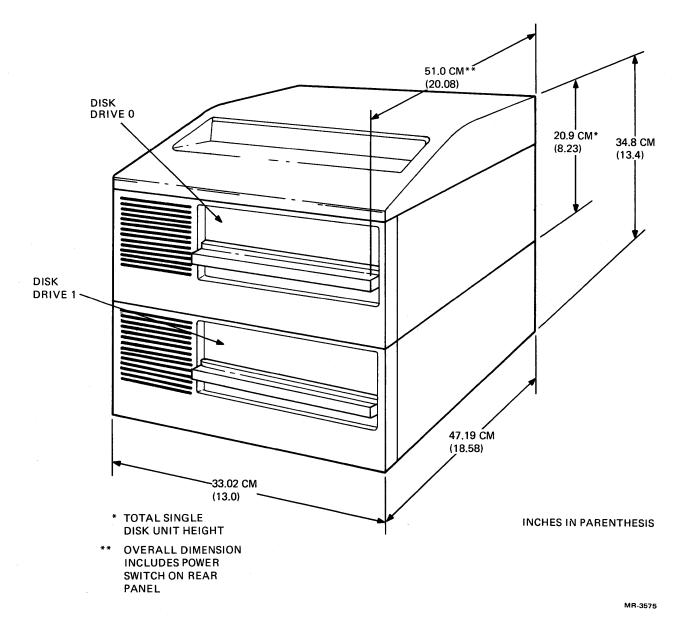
PDT-11/150 Single and Dual Disk Unit Dimensions
